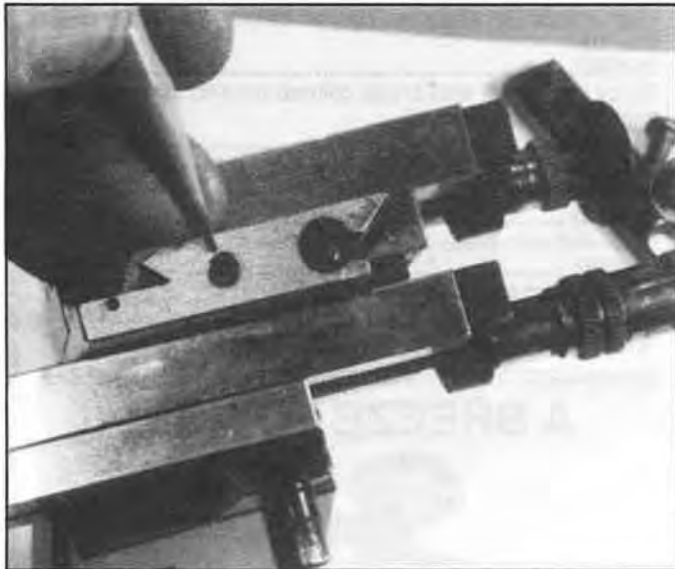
Bracket screw hole is threaded for #8-32 machine screw with a binder head.
